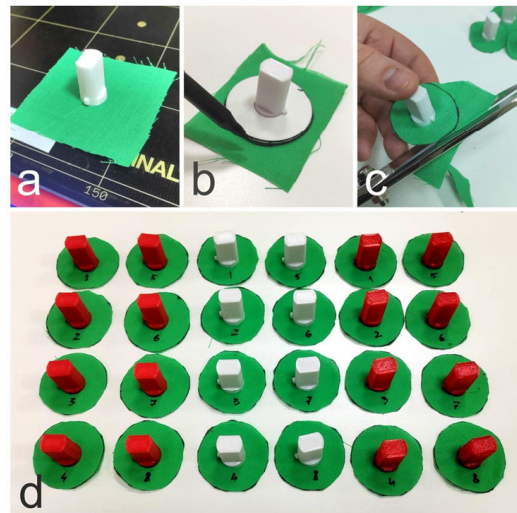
Perpendicular-dolly specimen fabrication workflow: (a) dolly printed directly onto the textile substrate; (b) marking the cutting outline using a template; (c) cutting the circular specimen; (d) complete specimen set ($n = 8$ per polymer).
